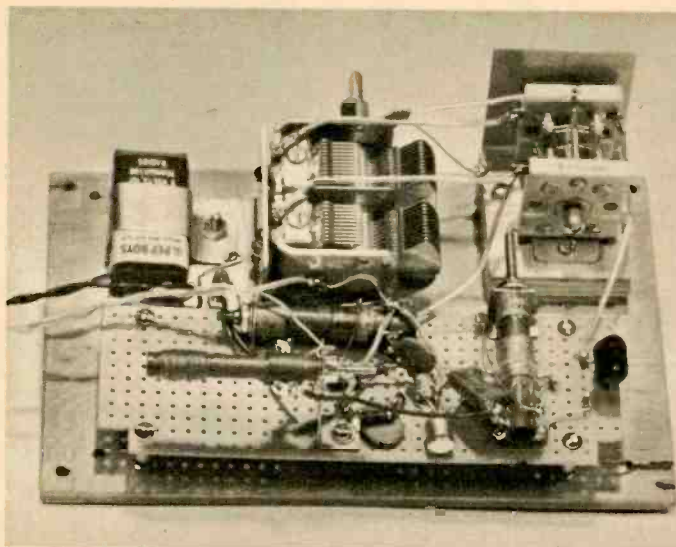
Photo shows completed converter ready for installation in cabinet. C2A/C2B (right) is mounted on $\frac{3}{8}$ -in.-thick wood block so shaft will be on same level as C1A/C1B's shaft. Author's model originally was built in Bakelite box; hence, notches in corners of circuit board to clear corner posts in box. Mount L1 (lower left) high so it will be near the top of the cabinet.
